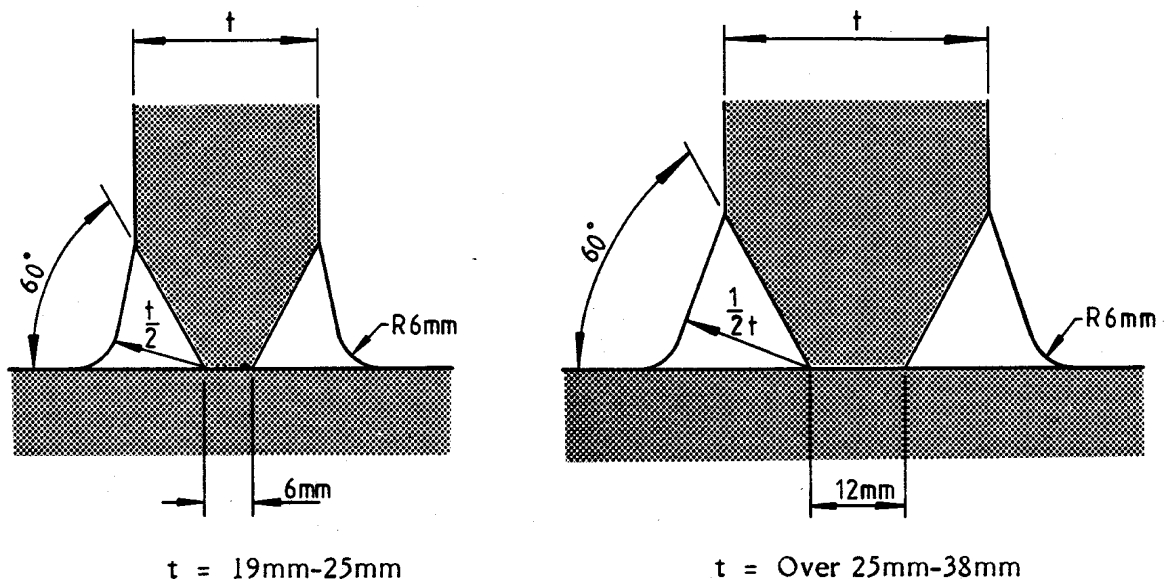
PREPARED FILLET WELDS
